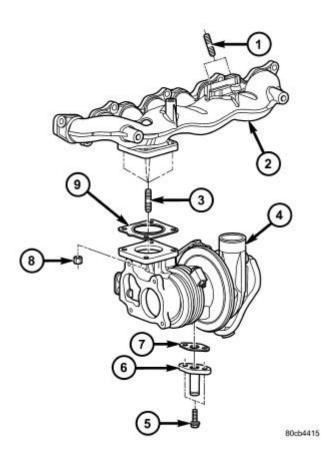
EXHAUST MANIFOLD AND TURBOCHARGER ASSEMBLY Courtesy of CHRYSLER LLC
